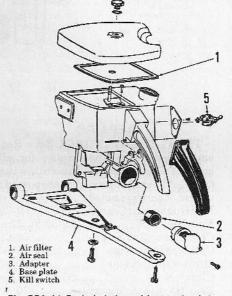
Exploded view of fuel tank, air box and rear handle typical of later models.
